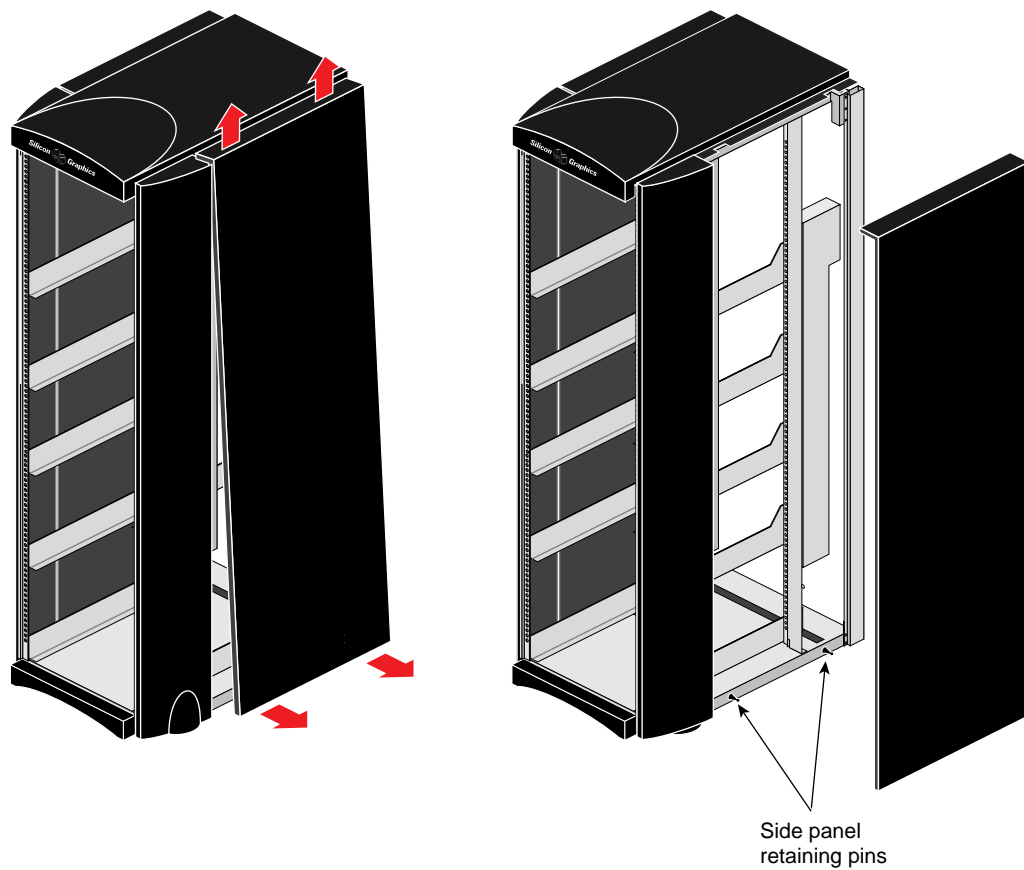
Removing the Fibre Channel Rack’s Side Panel
